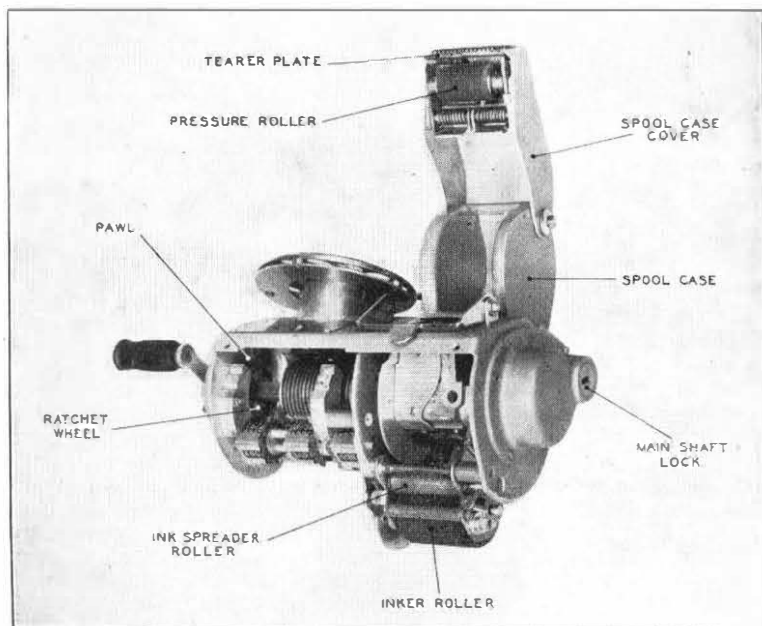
VIEW OF THE MECHANISM SHOWING INKING ARRANGEMENTS.
